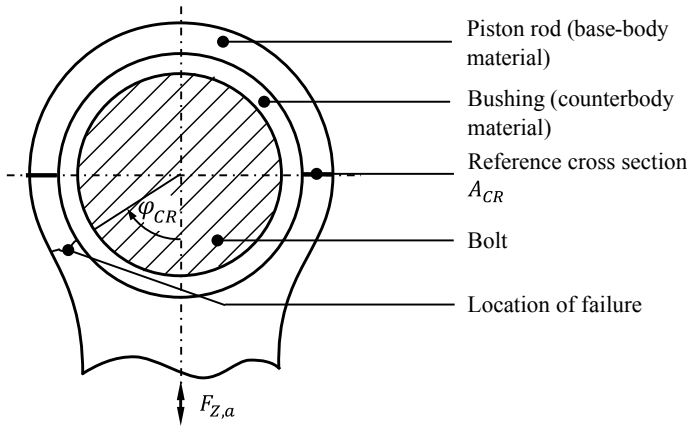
Piston-rod-bushing assembly, definition of the reference cross section, A_{CR} , and the location of failure, φ_{CR}
